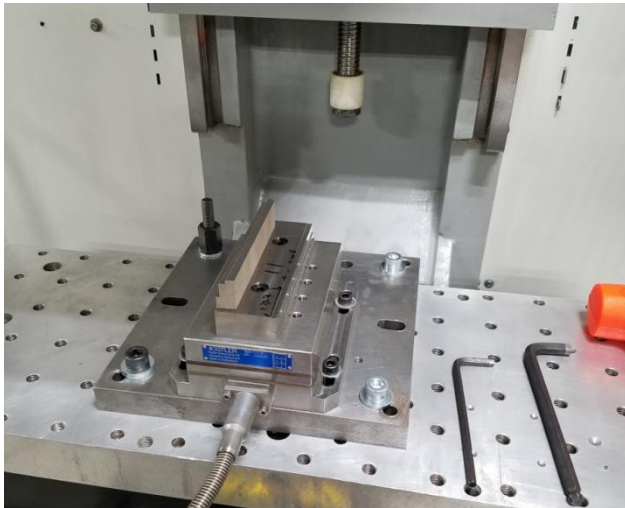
Machining experiment setup. The workpieces were mounted on a Kistler 9257B three-axis force dynamometer. All machining experiments were performed on a Haas TM-1 CNC milling machine.
